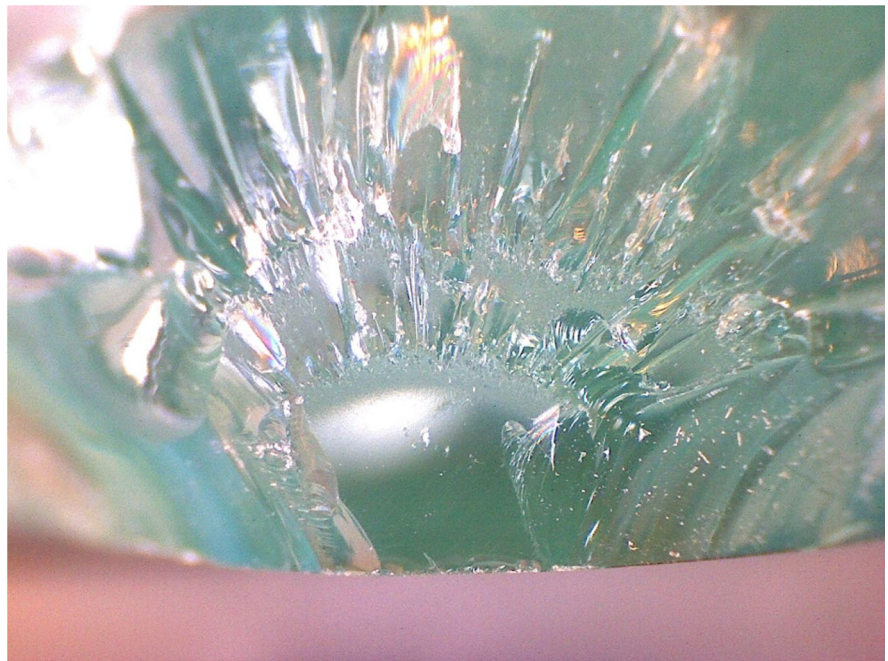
Fractography of butterfly piece, typical mist, mirror, hackle zones
